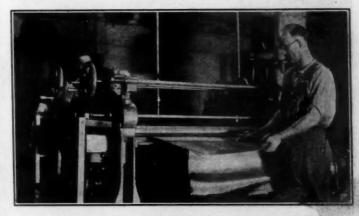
Sheets Passing through a Roller Leveler After the Stock Has Been Trimmed by a Rotary Shear into Regular Blanks, the Blanks Are Run Between Rollers To Remove Stretcher Strains
